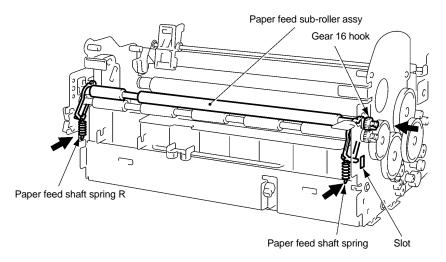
Installing the Paper Feed Sub-roller Assy (2)
